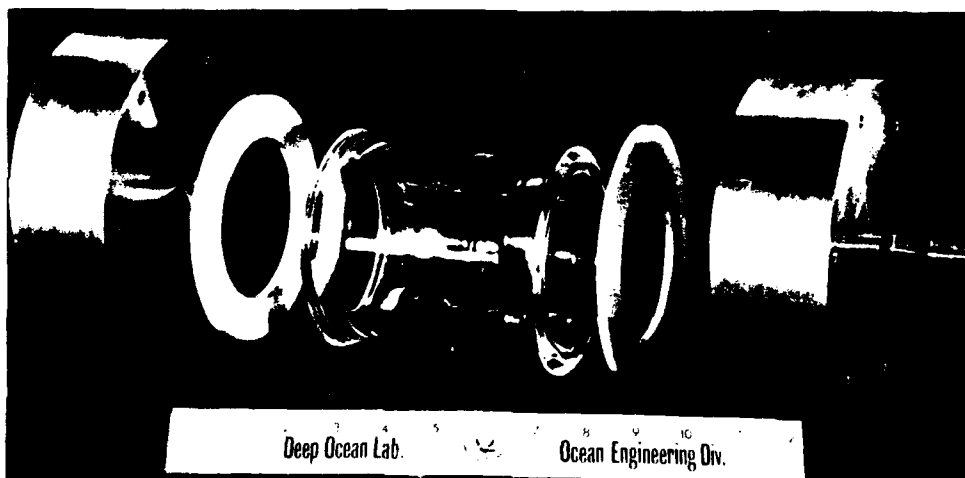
Component parts of an experimental test assembly used to test the seal provided by an aluminum washer interposed between the glass pipe end flanges and the metal end-closure plates.
